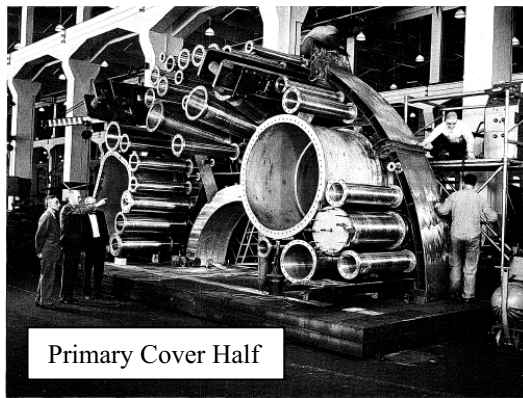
Helium Leak-Testing the Welds in a Completed Cover Half
